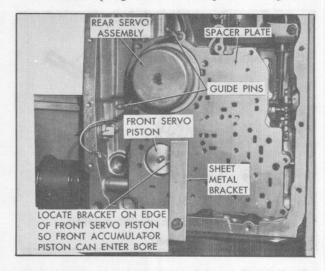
Installing Control Valve Assembly—(on Car)
